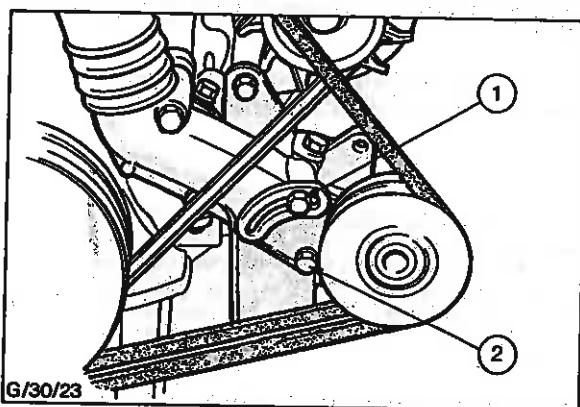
Drive Belt Adjustment - 'Low-Loss' Fan Drive Water Pump
